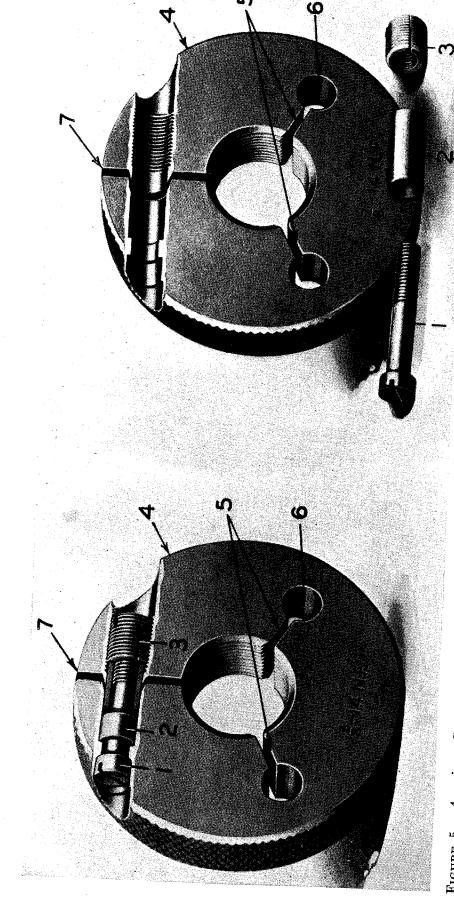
American Gage Design Standard thread ring gage locking device, details of construction, range No. 0 to 5½ inches, inclusive. 1, Locking screw; 2, sleeve; 3, adjusting screw; 4, body; 5, adjusting slots; 6, adjusting slot terminal hole; 7, locking slot.
